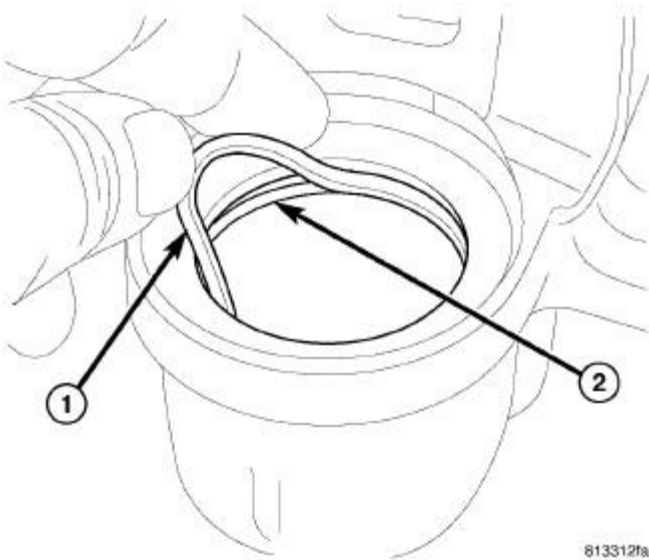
REAR CALIPER PISTON SEAL INSTALLATION
